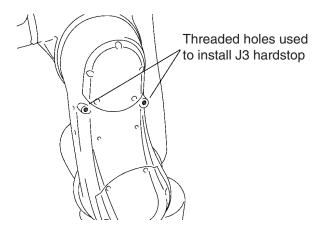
Threaded Holes for Joint 3 Hardstop
